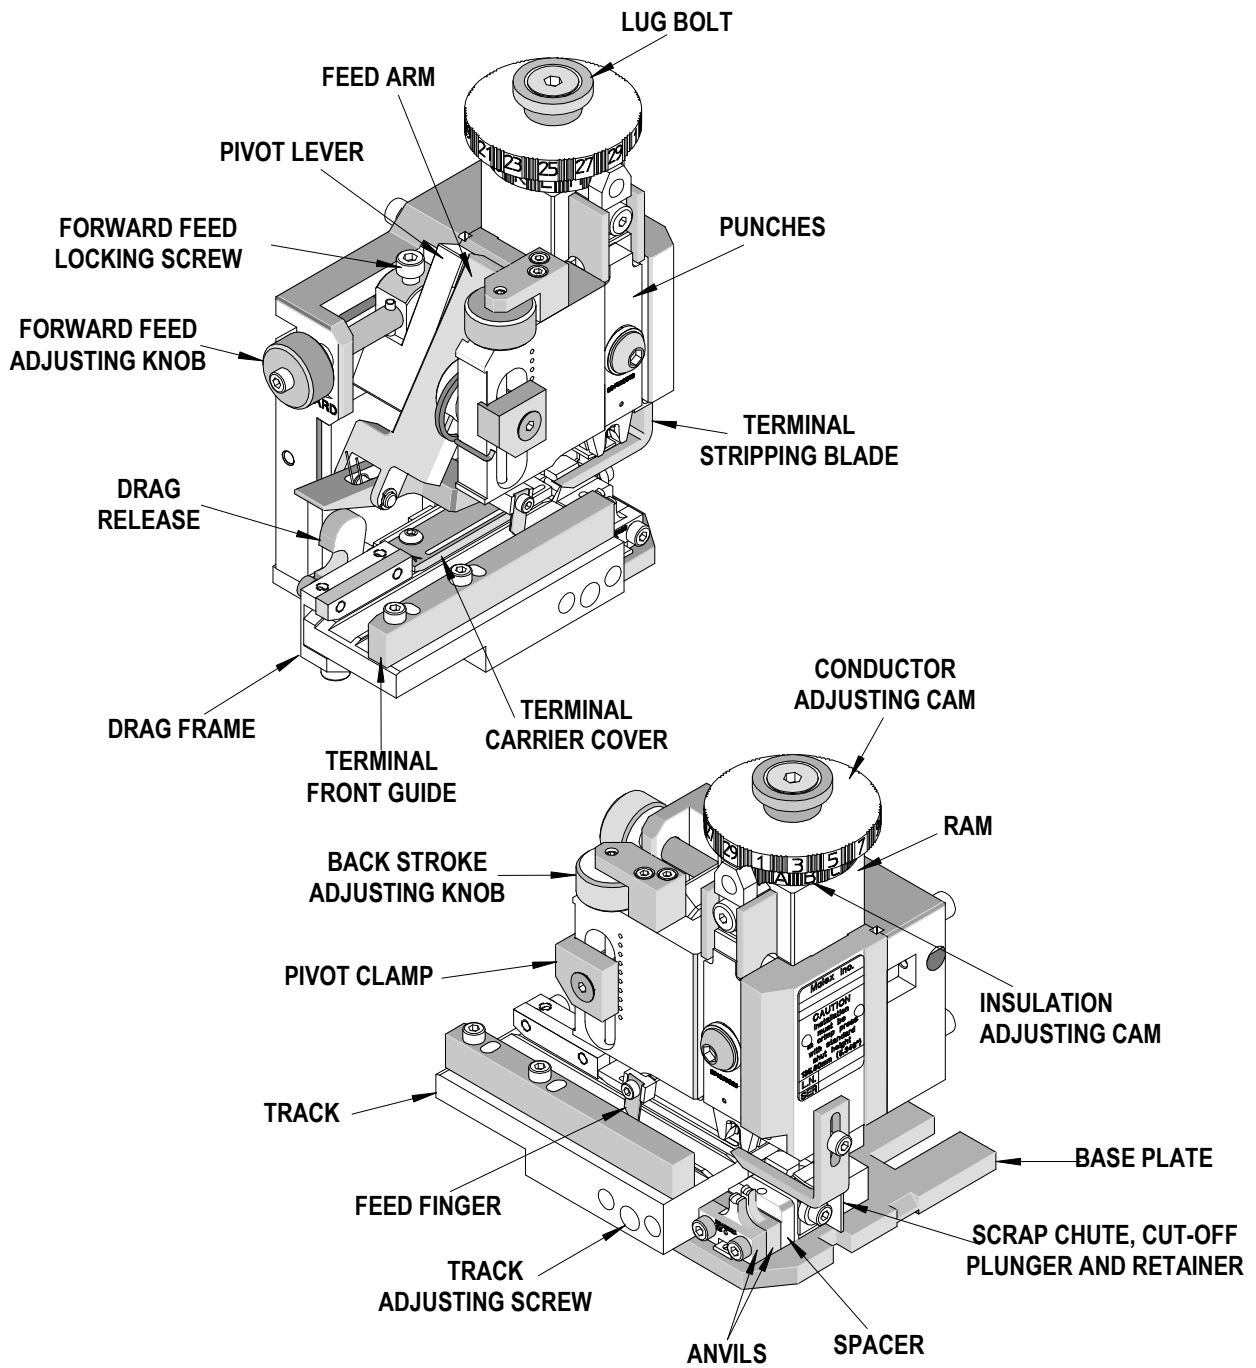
REAR-CARRIER METAL STRIP APPLICATOR
